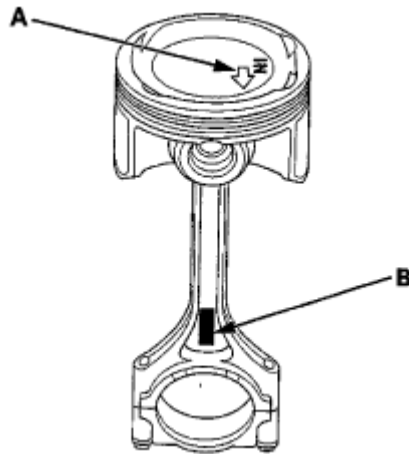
Identifying Arrow On Piston And Embossed Mark On Connecting Rod
